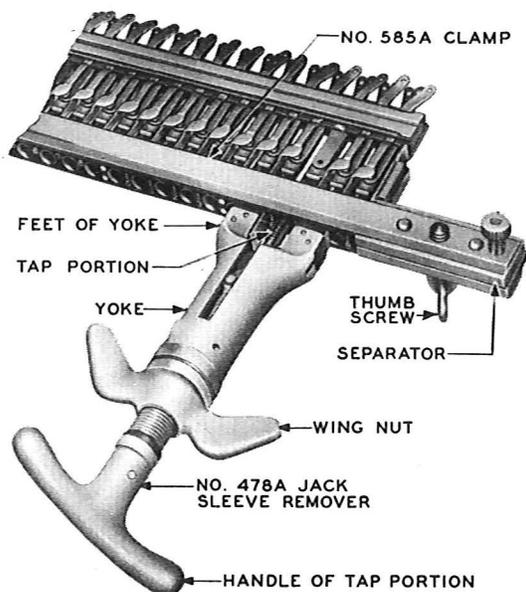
Method of Extracting Sleeve with No. 478A Jack Sleeve Remover
